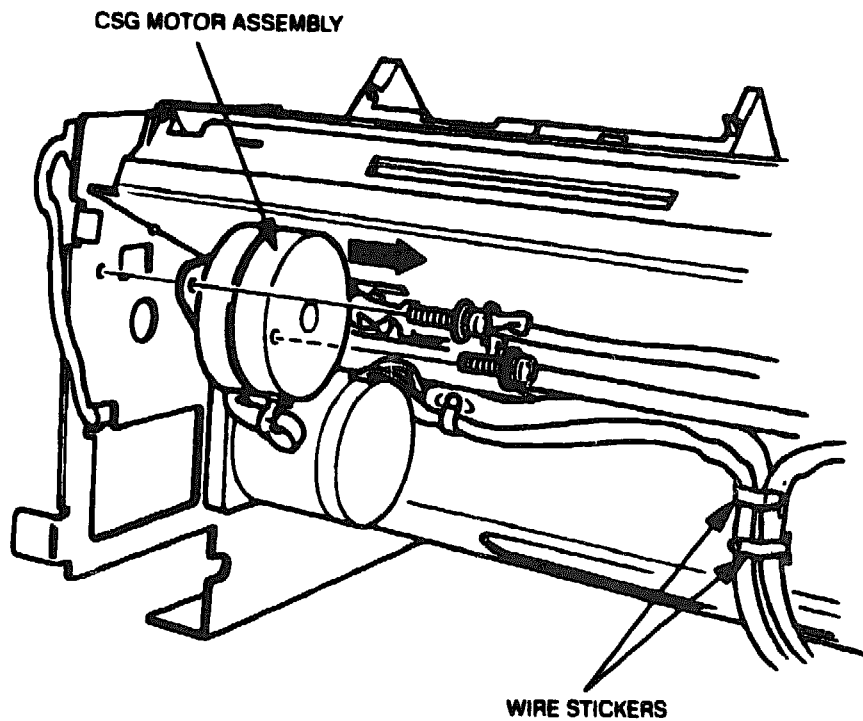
Cut Sheet Guide Motor Assembly Removal
